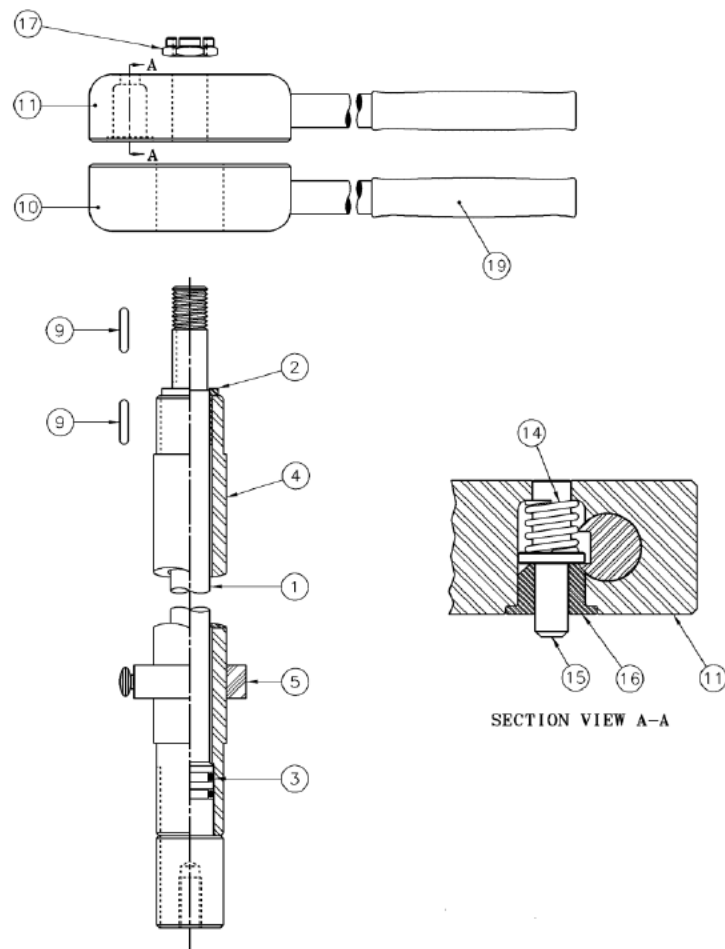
SHORTSTOPP® II Dual Control Bar Assembly
